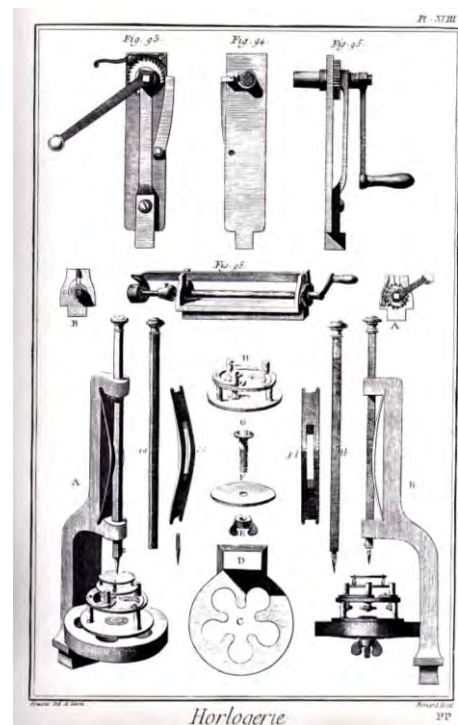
Illustration A and B - early versions of the uprighting or planting tool. (*L'Encyclopedie* by Diderot and Alembert, Paris, France, circa 1770)
